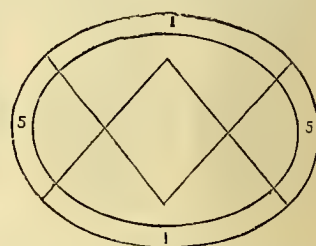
METHOD OF ARRANGING SEGMENTAL PIECES.
